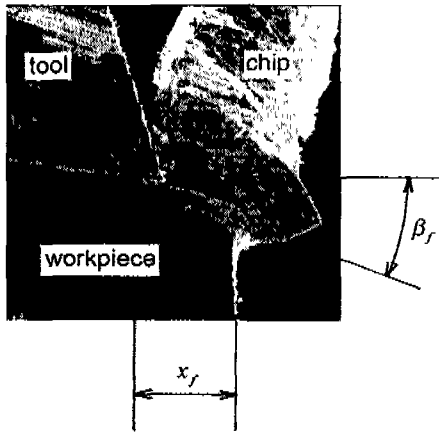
Fracture during Burr Formation in machining AL6061-T6
